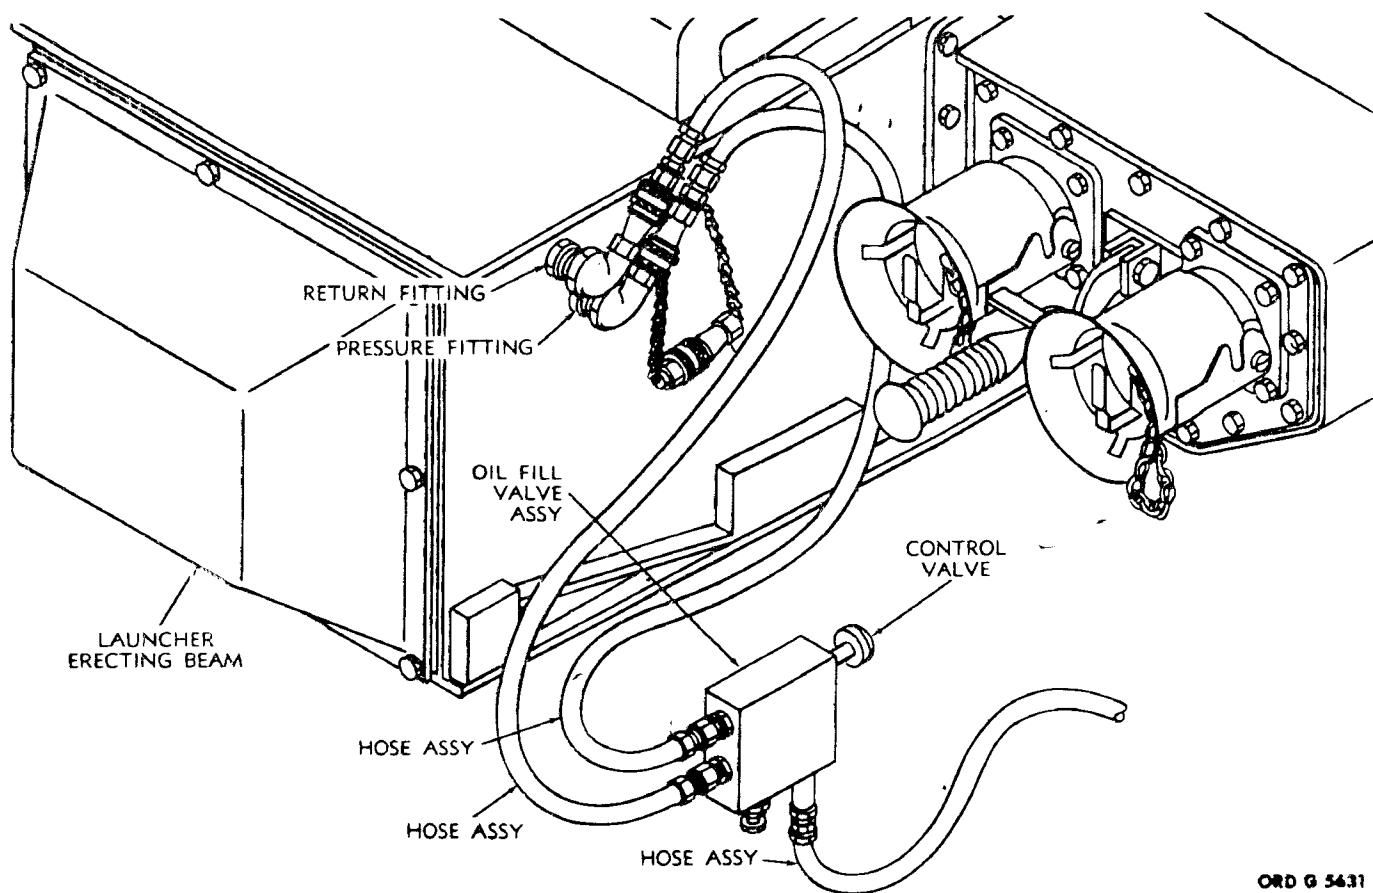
APS or HPU oil servicing, using the launching area oil fill valve assembly.
